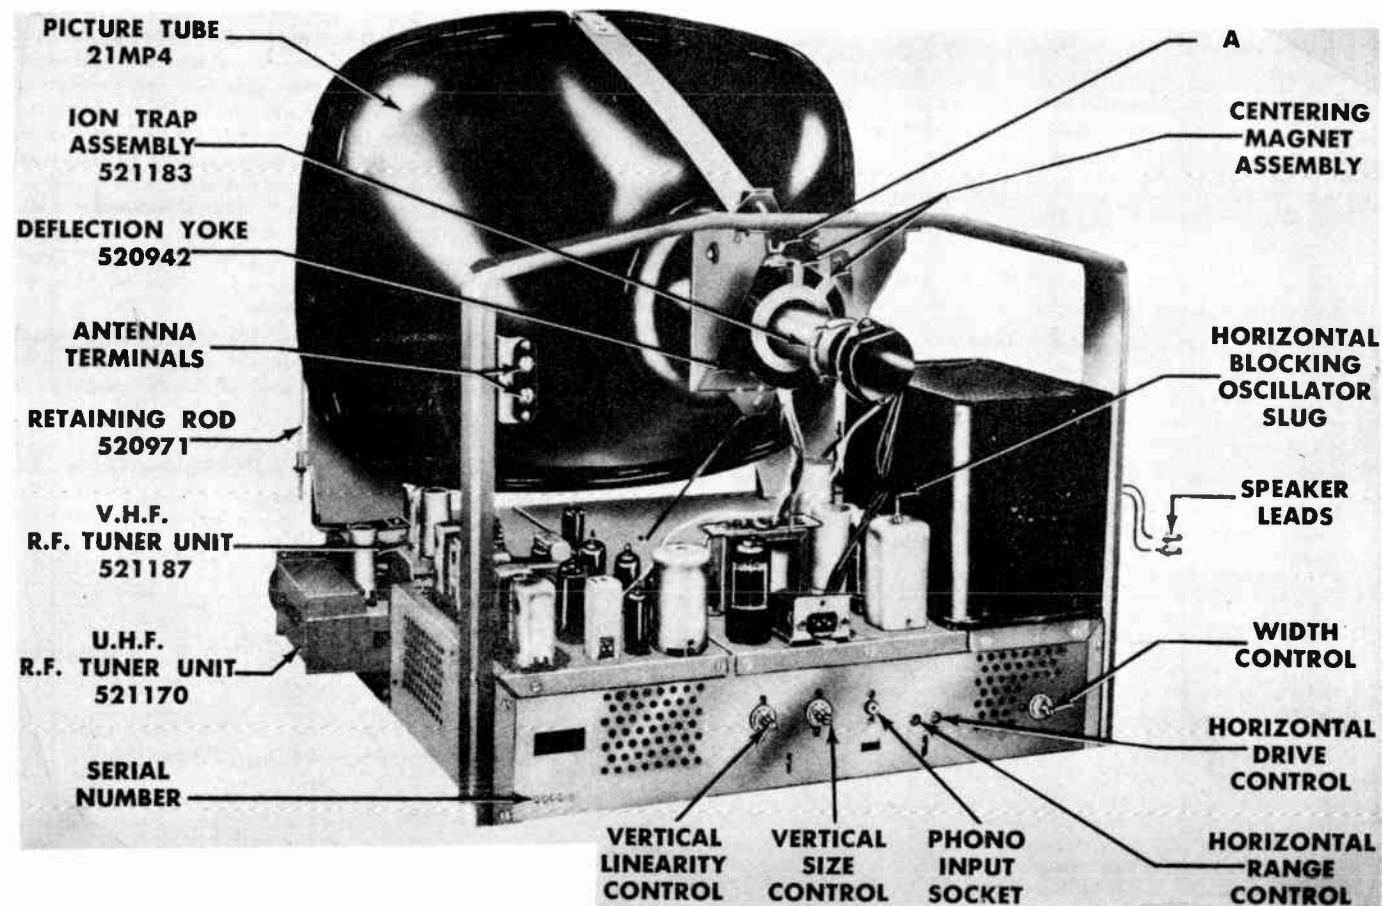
CHASSIS AND PICTURE TUBE ASSEMBLY
